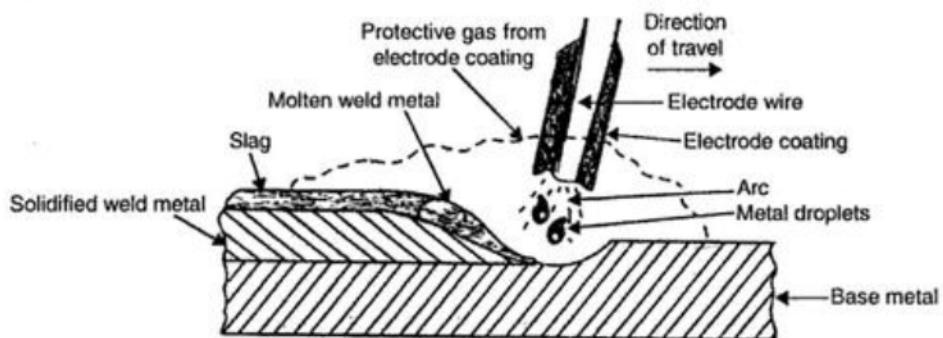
(a). Principle of Flux Shielded Metal Arc Welding.
